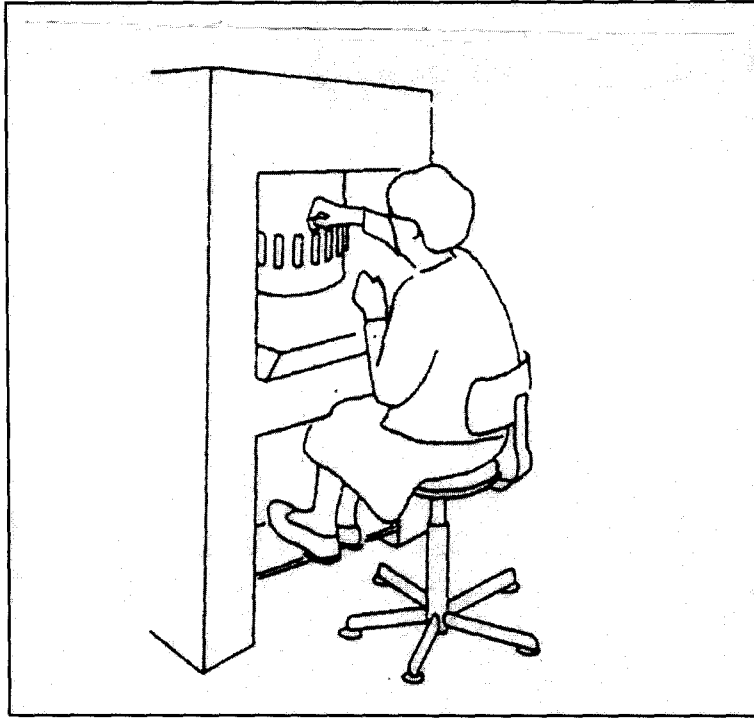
(B) Fitting component onto a machine with the arm continuously outstretched.
